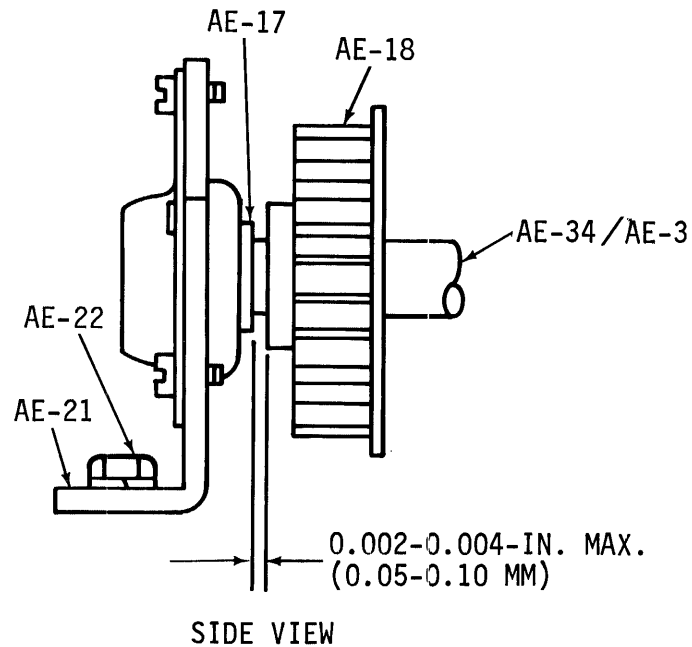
BUSHING END-PLAY ADJUSTMENT FOR FORWARD CLUTCH SHAFT, (PRELOAD CLUTCH)
